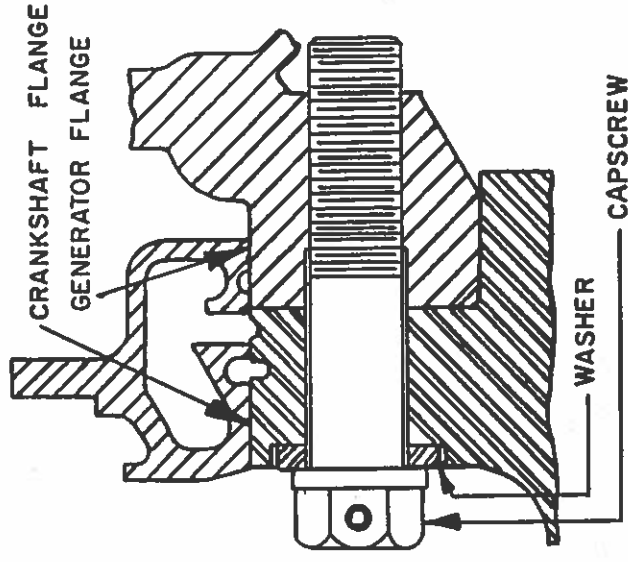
GENERATOR TO CRANKSHAFT CONNECTION
